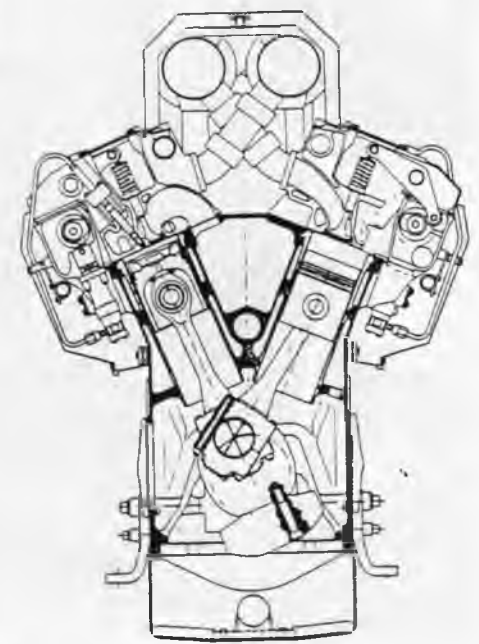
Cross-sectional view of V20/27 Vee engine.
